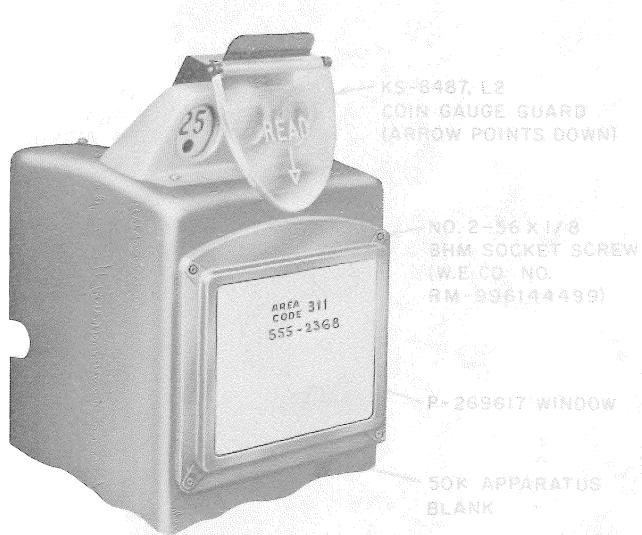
Manual Type Coin Collector Equipped With Coin Gauge Guard
